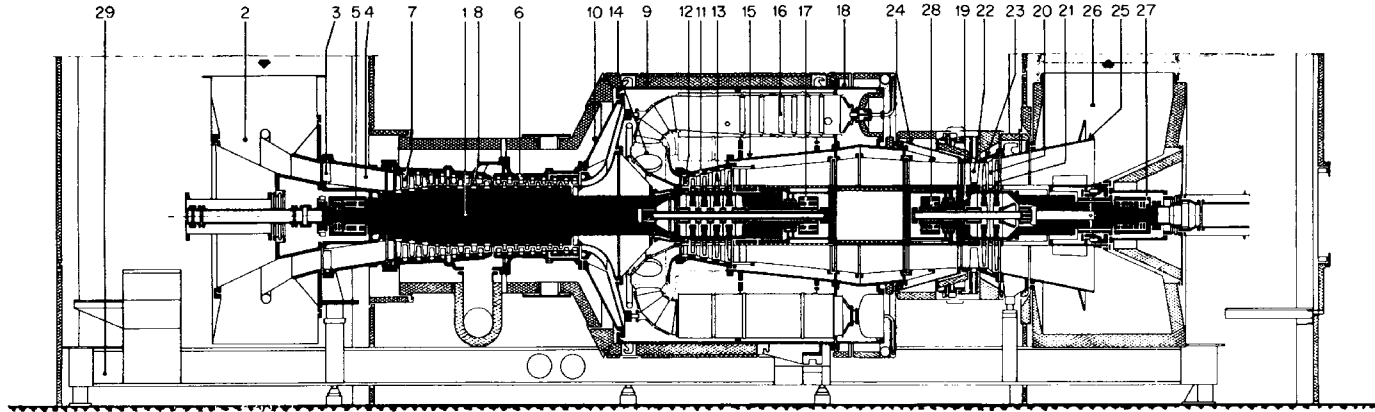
Gas turbine cross section: (1) gas generator turbine rotor, (2) inlet air casing, (3) compressor inlet guide vanes, (4) conical inlet casing with bearing support, (5) compressor radial-axial bearing, (6) compressor stator, (7) compressor stator blades, (8) compressor rotor blades, (9) combustion chamber main casing, (10) intermediate conical casing with diffuser, (11) gas generator turbine stator blade carrier, (12) gas generator turbine stator blades, (13) gas generator turbine rotor blades, (14) hot gas casing, (15) intermediate casing, (16) nine incorporated combustion chambers, (17) compressor radial bearing, (18) central casing, (19) power turbine rotor, (20) power turbine stator blades, (21) power turbine rotor blades, (22) power turbine adjustable rotor blades, (23) power turbine stator blade carrier, (24) conical intermediate piece, (25) outlet diffuser, (26) outlet casing, (27) power turbine radial-axial bearing, (28) power turbine radial bearing, (29) metallic foundation (Turbodyne)
